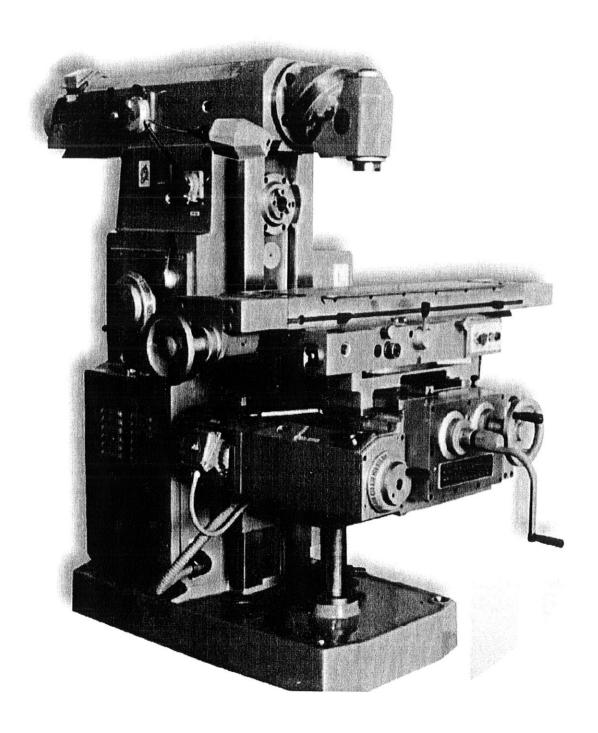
Overview of Series X6230 Universal Rotary Head Milling Machine
